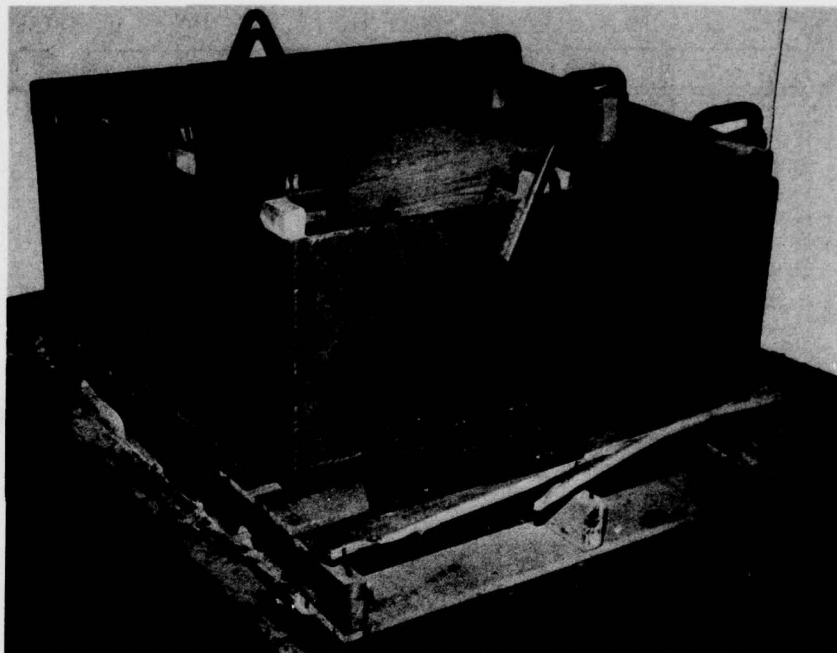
Typical failure pattern of lumber (control) pallet because of handling impact testing. (M 145 510-1)
